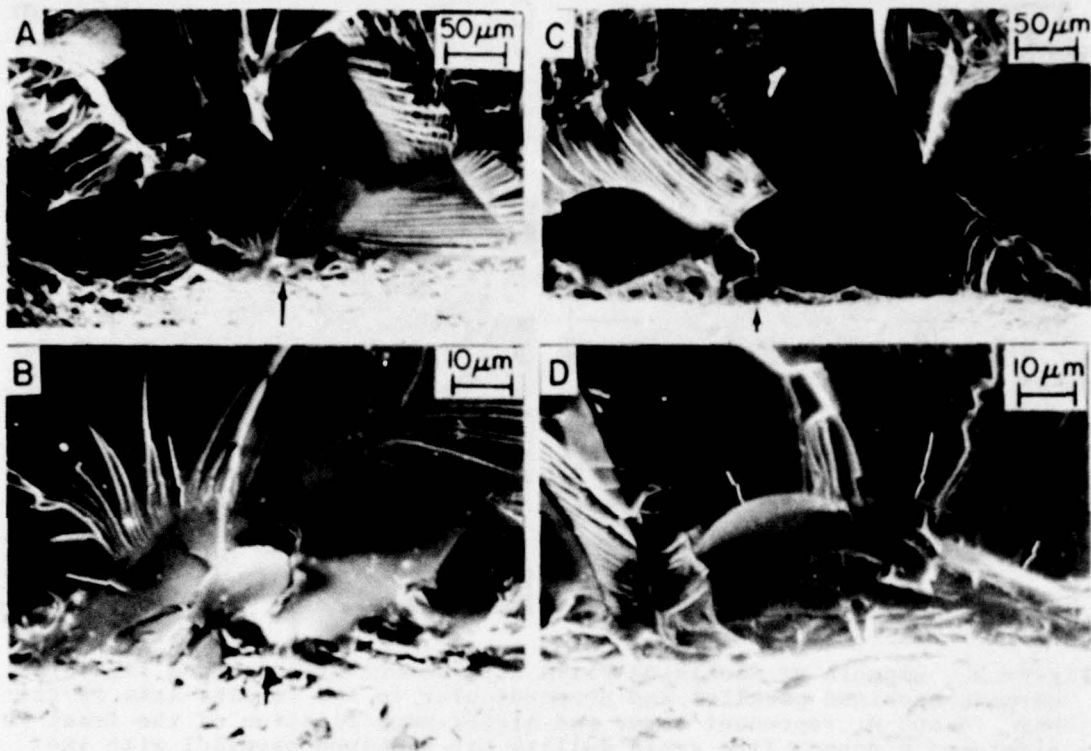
Examples of machining flaws at the fracture origins for parallel and perpendicular machining of a large grain ceramic. A and B show the fracture origin area and the specific failure causing flaw (arrows) as a result of grinding a dense, sintered  $Y_2O_3$  (Yttralox) bar parallel with the tensile axis. Note the nearly semicircular nature of the final flaw boundary and that the flaw is substantially less than the size of the grain in which it formed. C and D show the fracture surface and fracture origin (arrows) of a specimen of the same material ground perpendicular to the tensile axis. Note the more elongated character of the flaw but that it is again substantially smaller than the size of the grain in which it is located.
